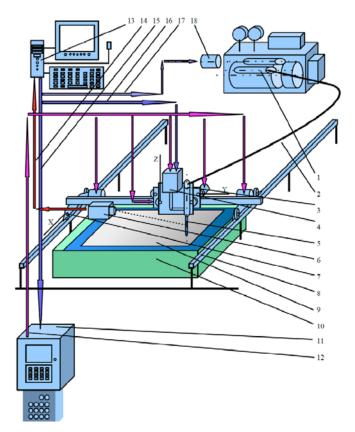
System for measuring the diameter of the abrasive water jet on a cutting machine.
